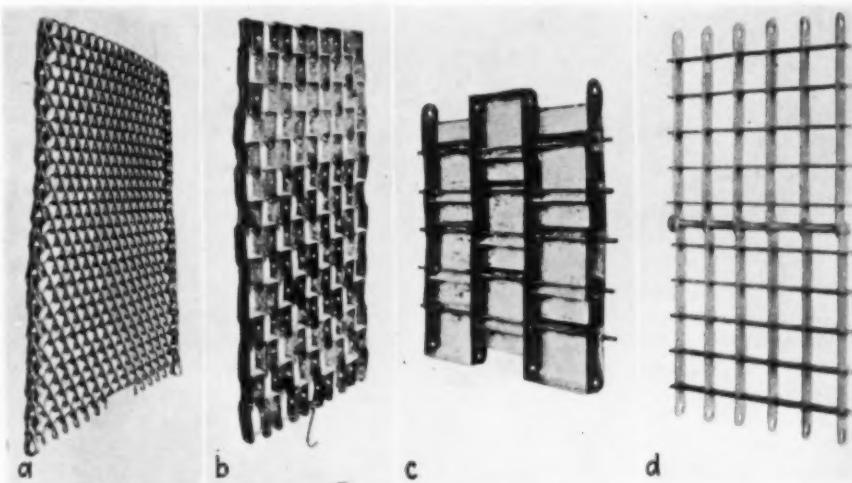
Typical Steps in Dryer Conveyor-Belt Evolution: (a) Spiral Woven-Wire Belt; (b) Heavy-Duty Pressed-Metal Belt;
